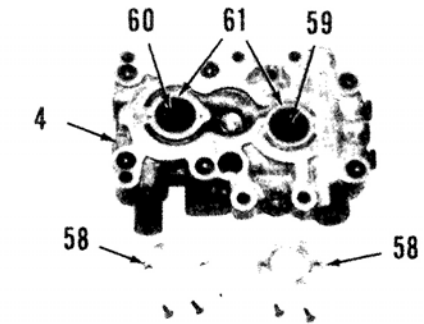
View showing port block (4) with flange covers (58) removed. Note pump side needle bearing (59), motor side needle bearing (60) and oil seals (61).
